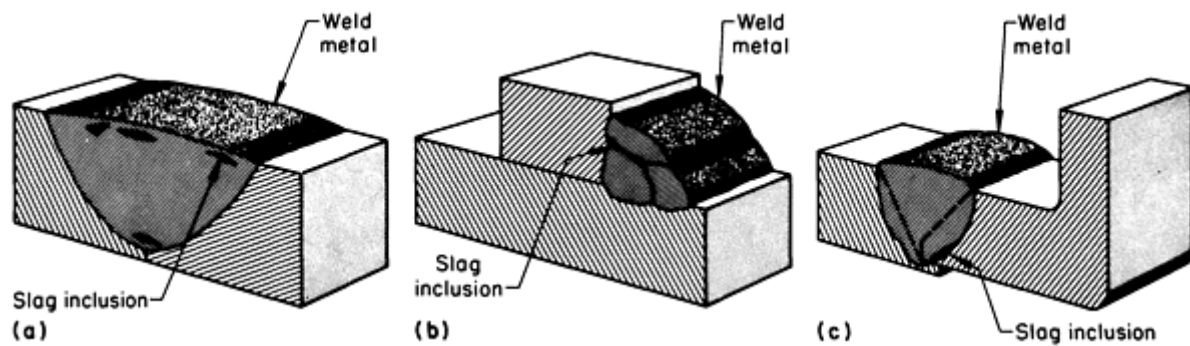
SECTIONS SHOWING LOCATIONS OF SLAG INCLUSIONS IN WELD METAL. (A) NEAR THE SURFACE AND IN THE ROOT OF A SINGLE-PASS WELD. (B) BETWEEN WELD BEADS IN A MULTIPLE-PASS WELD. (C) AT THE SIDE OF A WELD NEAR THE ROOT
